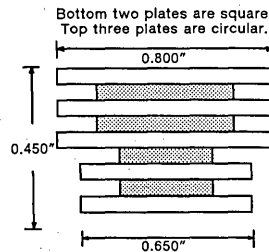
Aluminum Circular Fin Heat Sink for 160 QFP Package (Preliminary Drawing)
